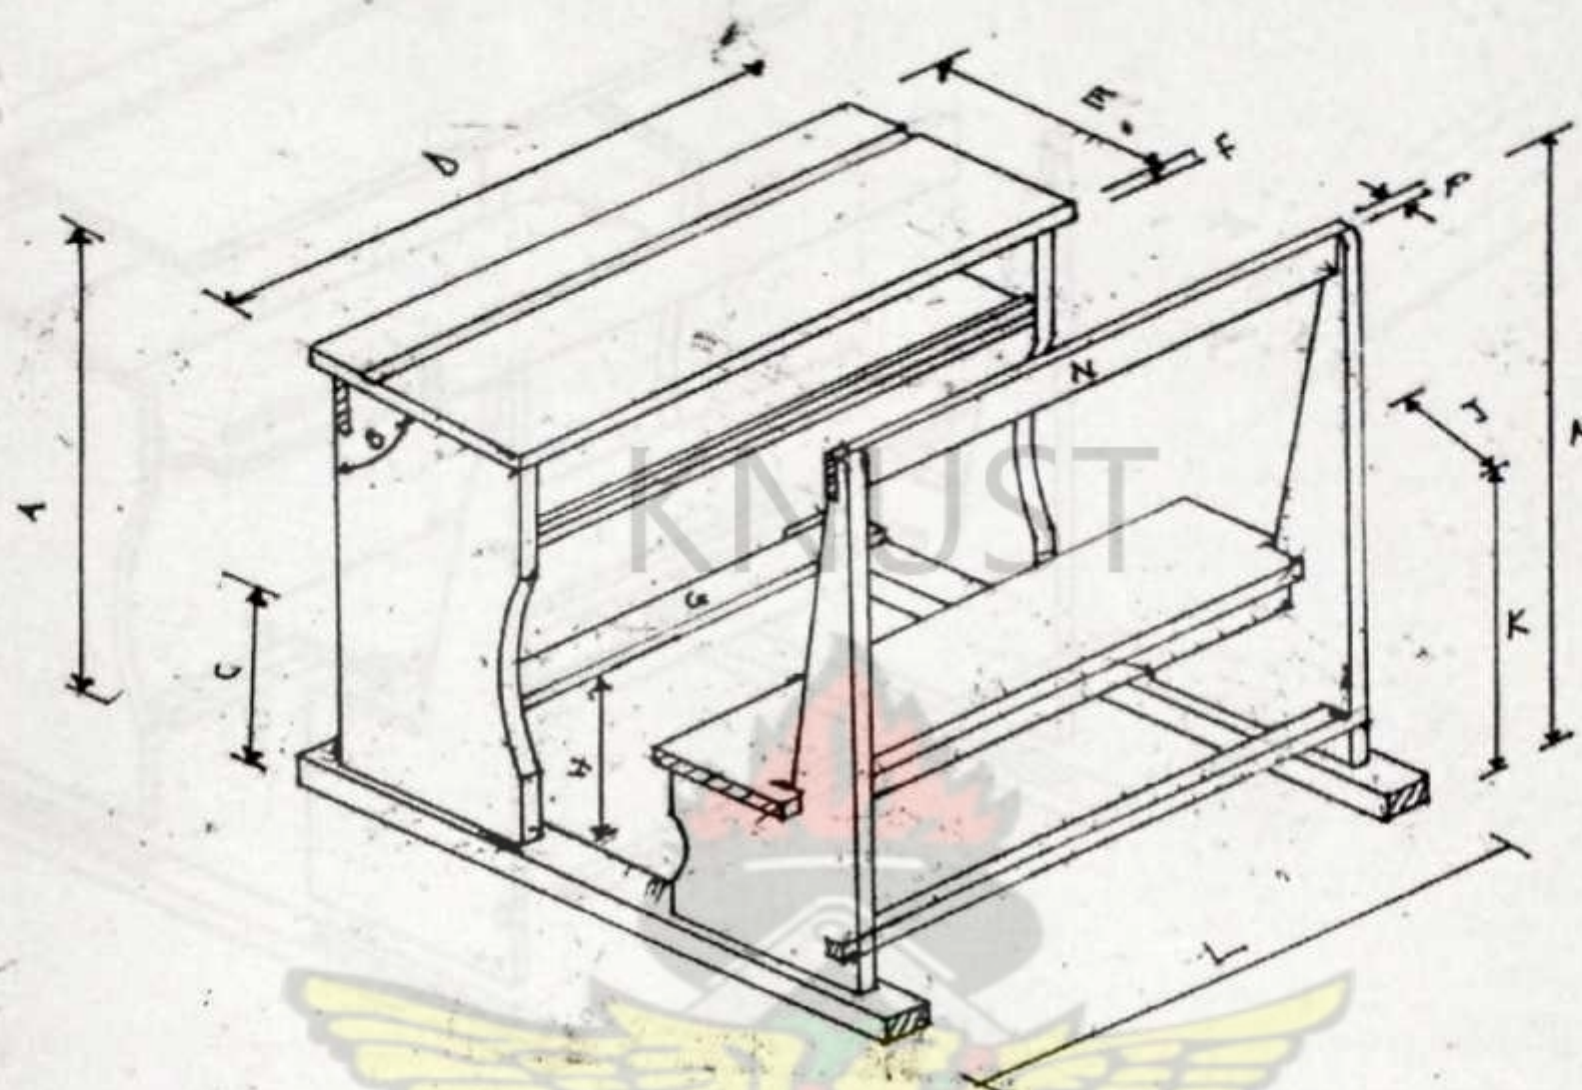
An exploded view of the mono-desk and chair used by students of Agona Secondary Technical School.
